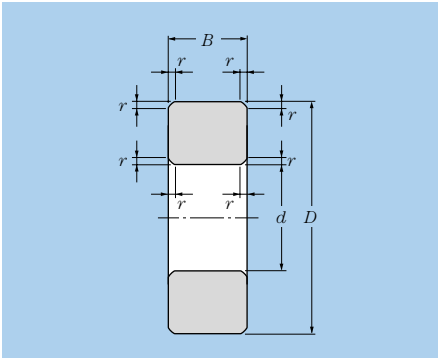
Radial Bearing (tapered roller bearings not included)
